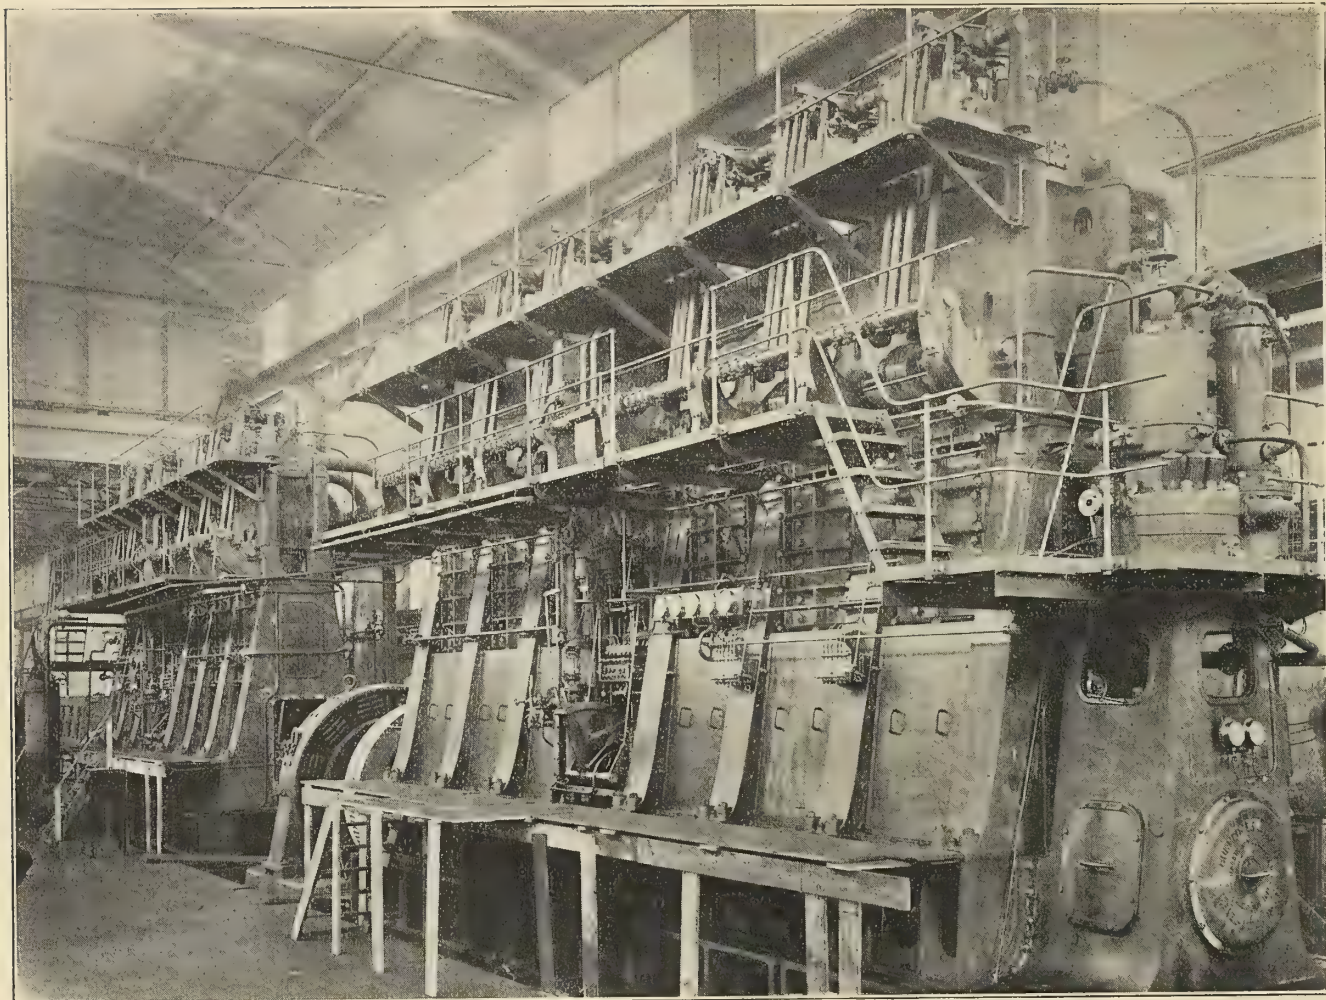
Six-Cylinder Diesel Engines, Built by Burmeister & Wain for the Motor Ship *Tongking
